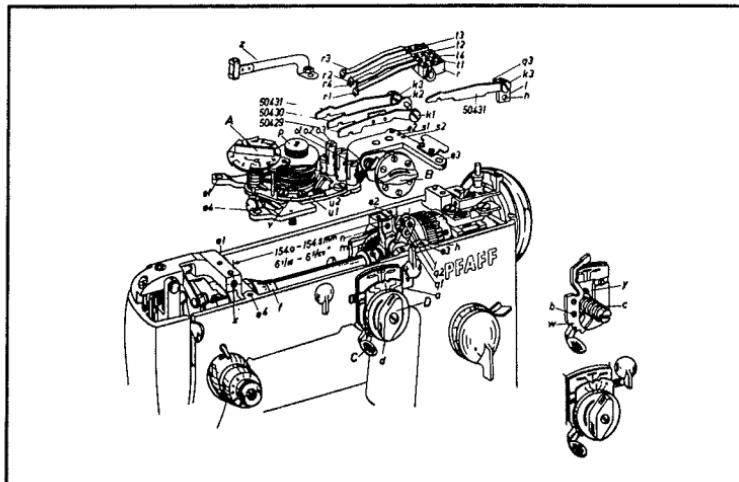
The zig-zag mechanism of the Pfaff 230 and 332. A. Cam selector dial; B. Clutch bar dial; C. Needle position lever; D. Zigzag button (Dial-A-Stitch control); E. Pattern length lever (not illustrated); a. Stitch width scale (105162); b. Lower set screw (175) of notched member (105163); c. Pressure spring (105167) for zigzag button; d. Set screws (687) for zigzag button, e1-e4. Set screws (72) for base plate; f. Driving eccentric (105061) for Automatic Mechanism; h. Spacer (obsolete 105094); (two-part 105095/96); i. Connection (105089); k1-k3. Eccentric studs (50432); j. Clutch bar bearing bracket (50436) m. Stitch width regulator arm; n. Set screw (486) for clutch bar bearing bracket; o1-o3. Clutch bar driving studs (50384); p. Stack of pattern cams with nut; q1-q3. Set screws (543) for eccentric studs k1-k3; r. Spring carrier blocks (50457); r1-r3. Leaf springs (50433) for clutch bars; s1-s3. Screwholes for spring assembly bracket (50455); t1-t4. Regulating screws (701034); u1-u3. Screws (407) for connections (50401/50402); v. Two-part connection (50400); w. Notched member (105163); x. Hole for gauge (105999-108); y. Setscrew (624) for crank (105093); and z. Oil pad carrier spring (50492).
